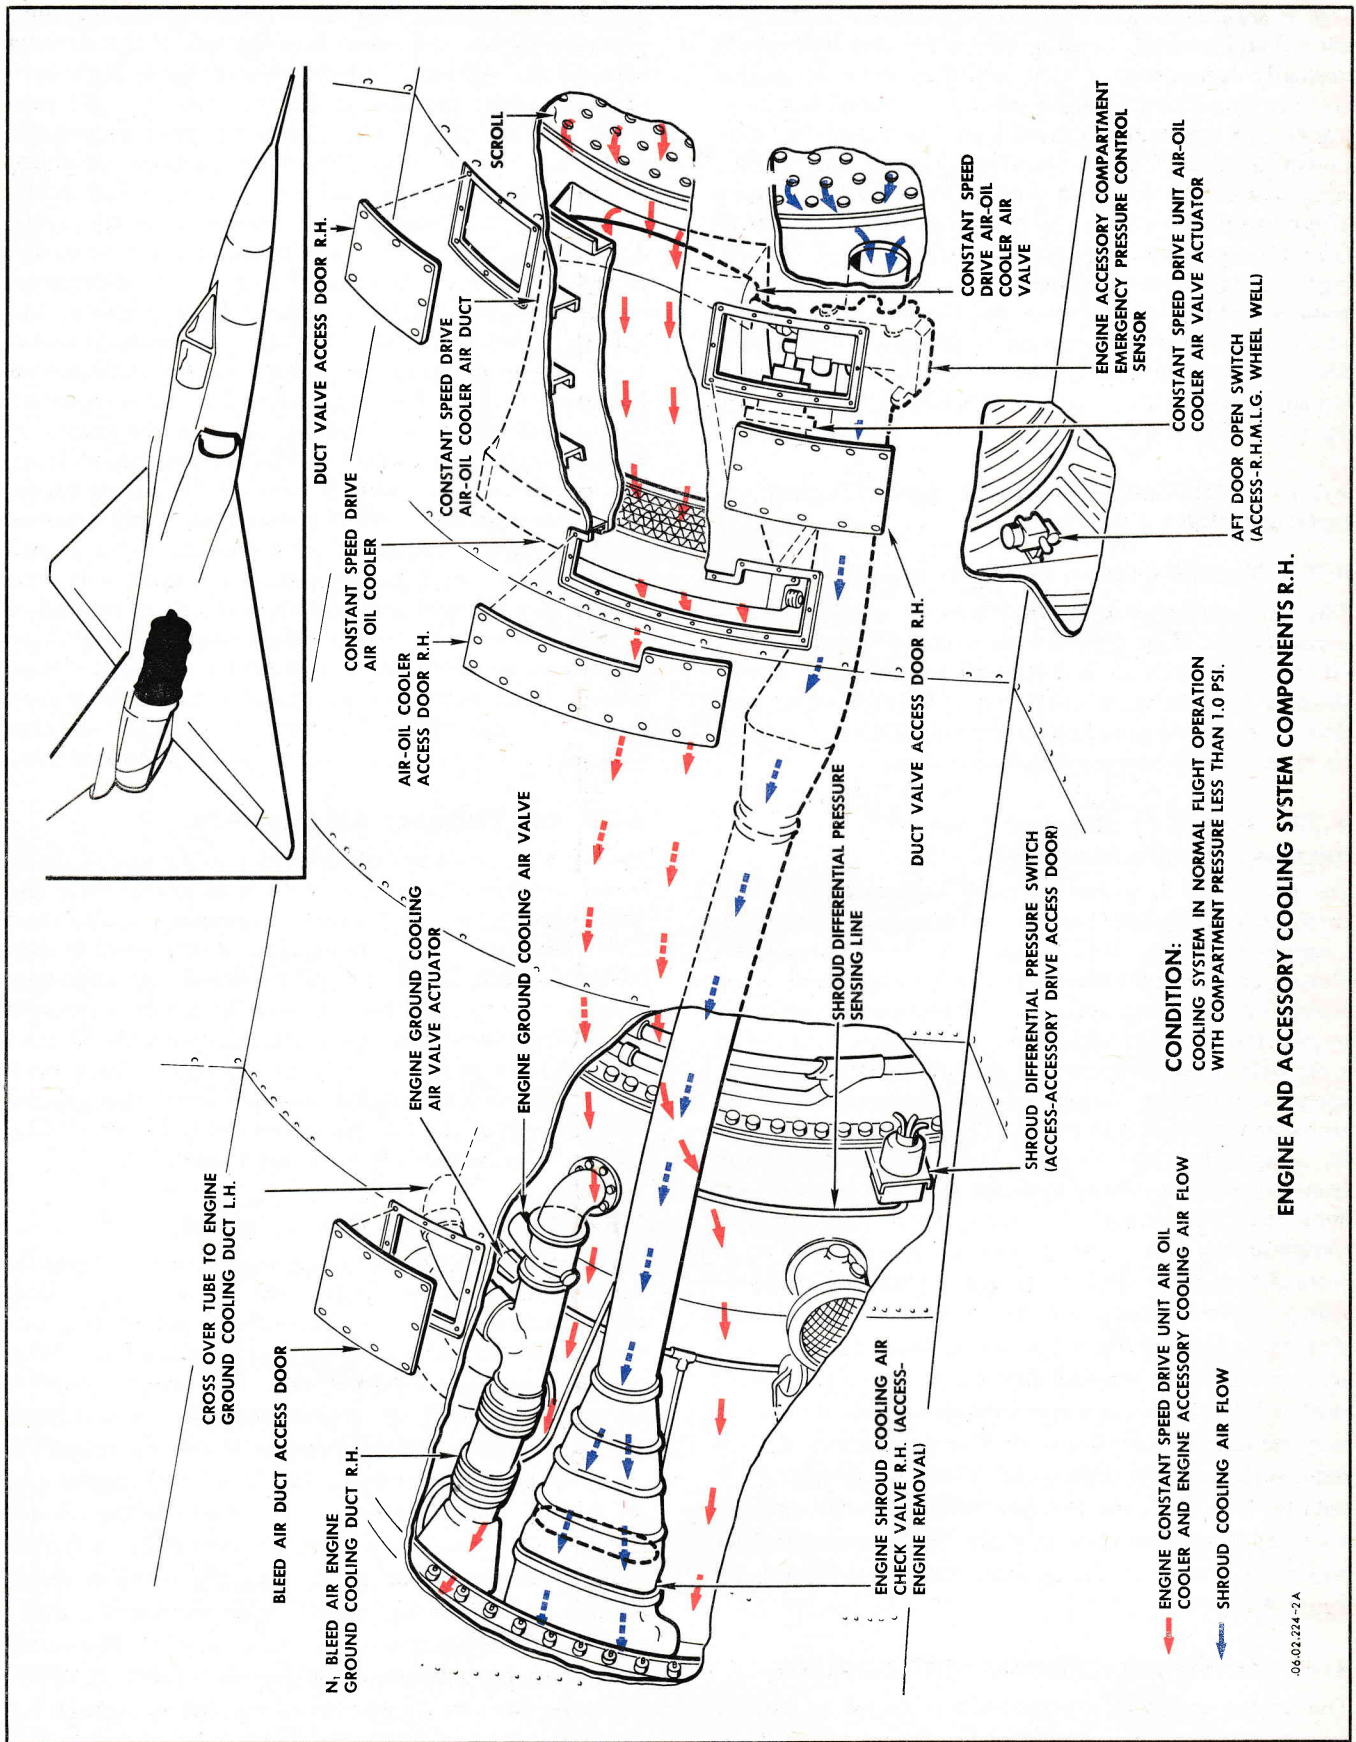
Engine and Accessory Cooling System (Sheet 2 of 2)
